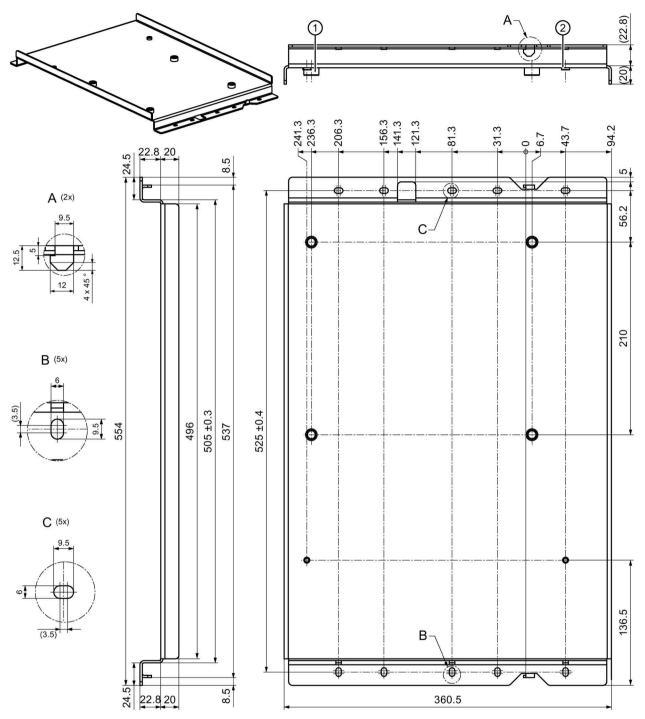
Mounting plate for a 600 mm wide Rittal VX25 control cabinet
